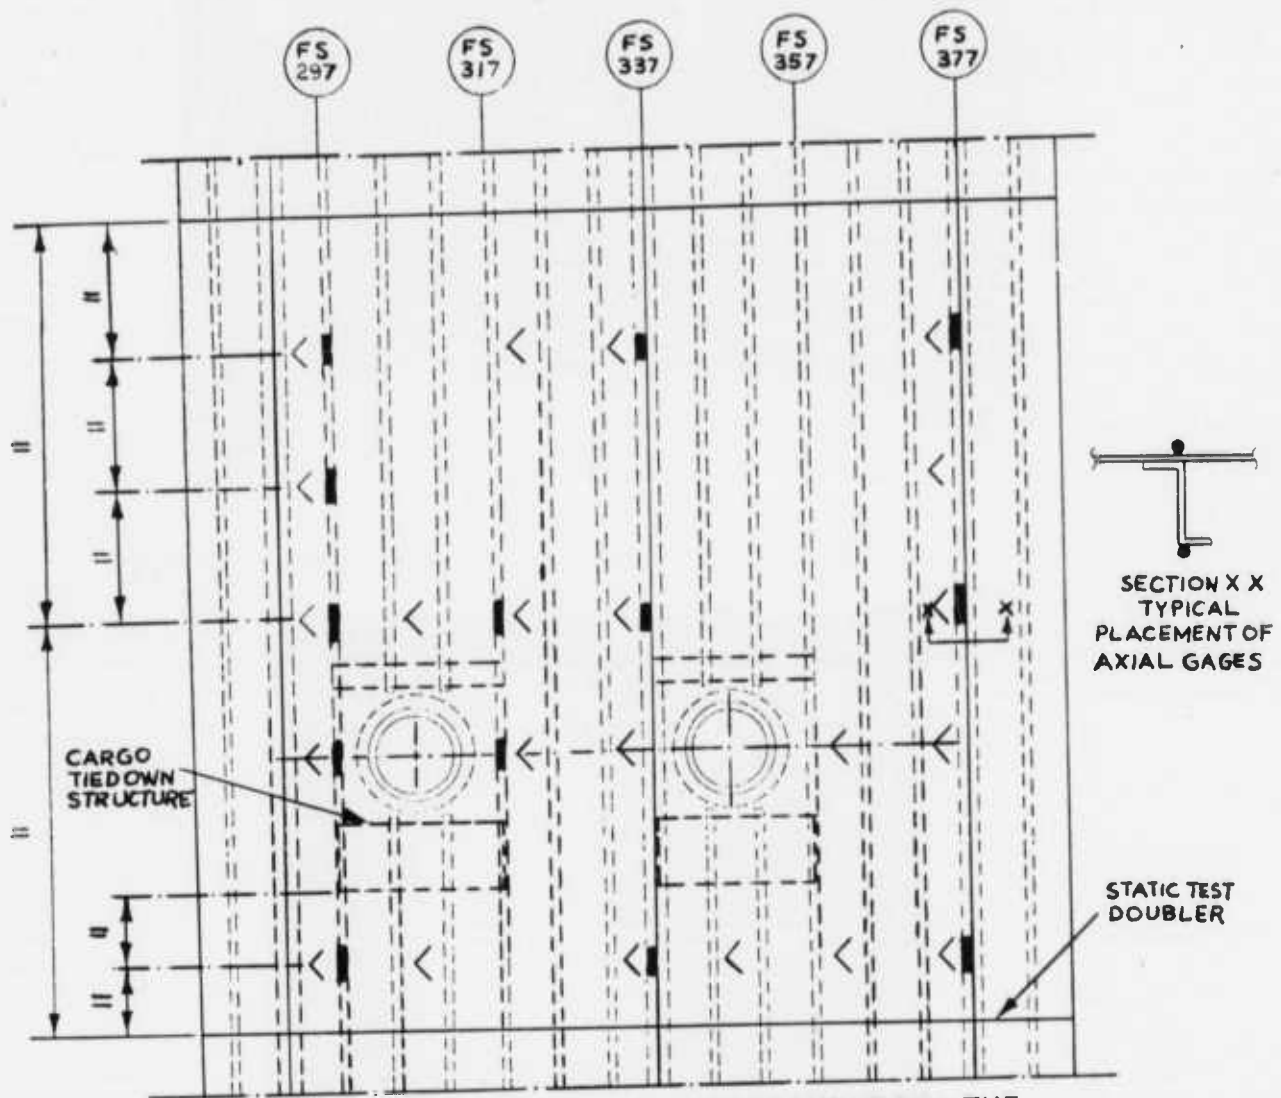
INSTRUMENTATION ARRANGEMENT FOR THE WELDBONDED COMPONENT
